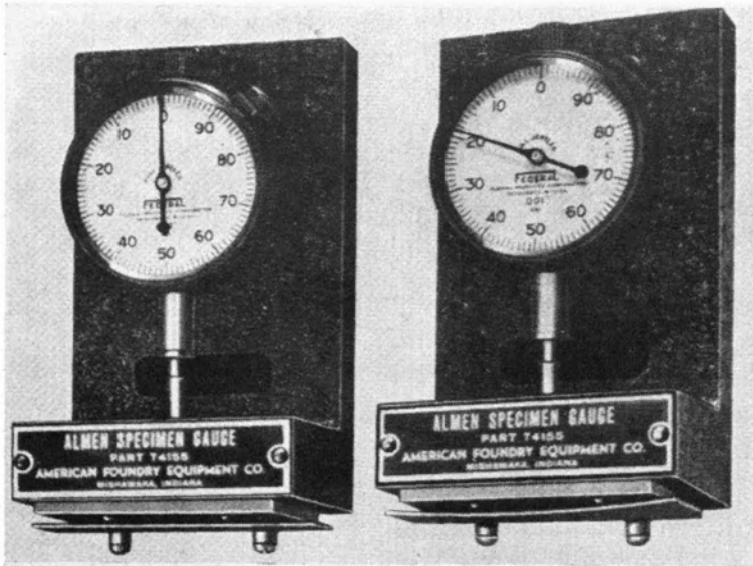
ALMEN SPECIMEN GAUGE FOR MEASURING ARC HEIGHT OF ALMEN TEST STRIPS
